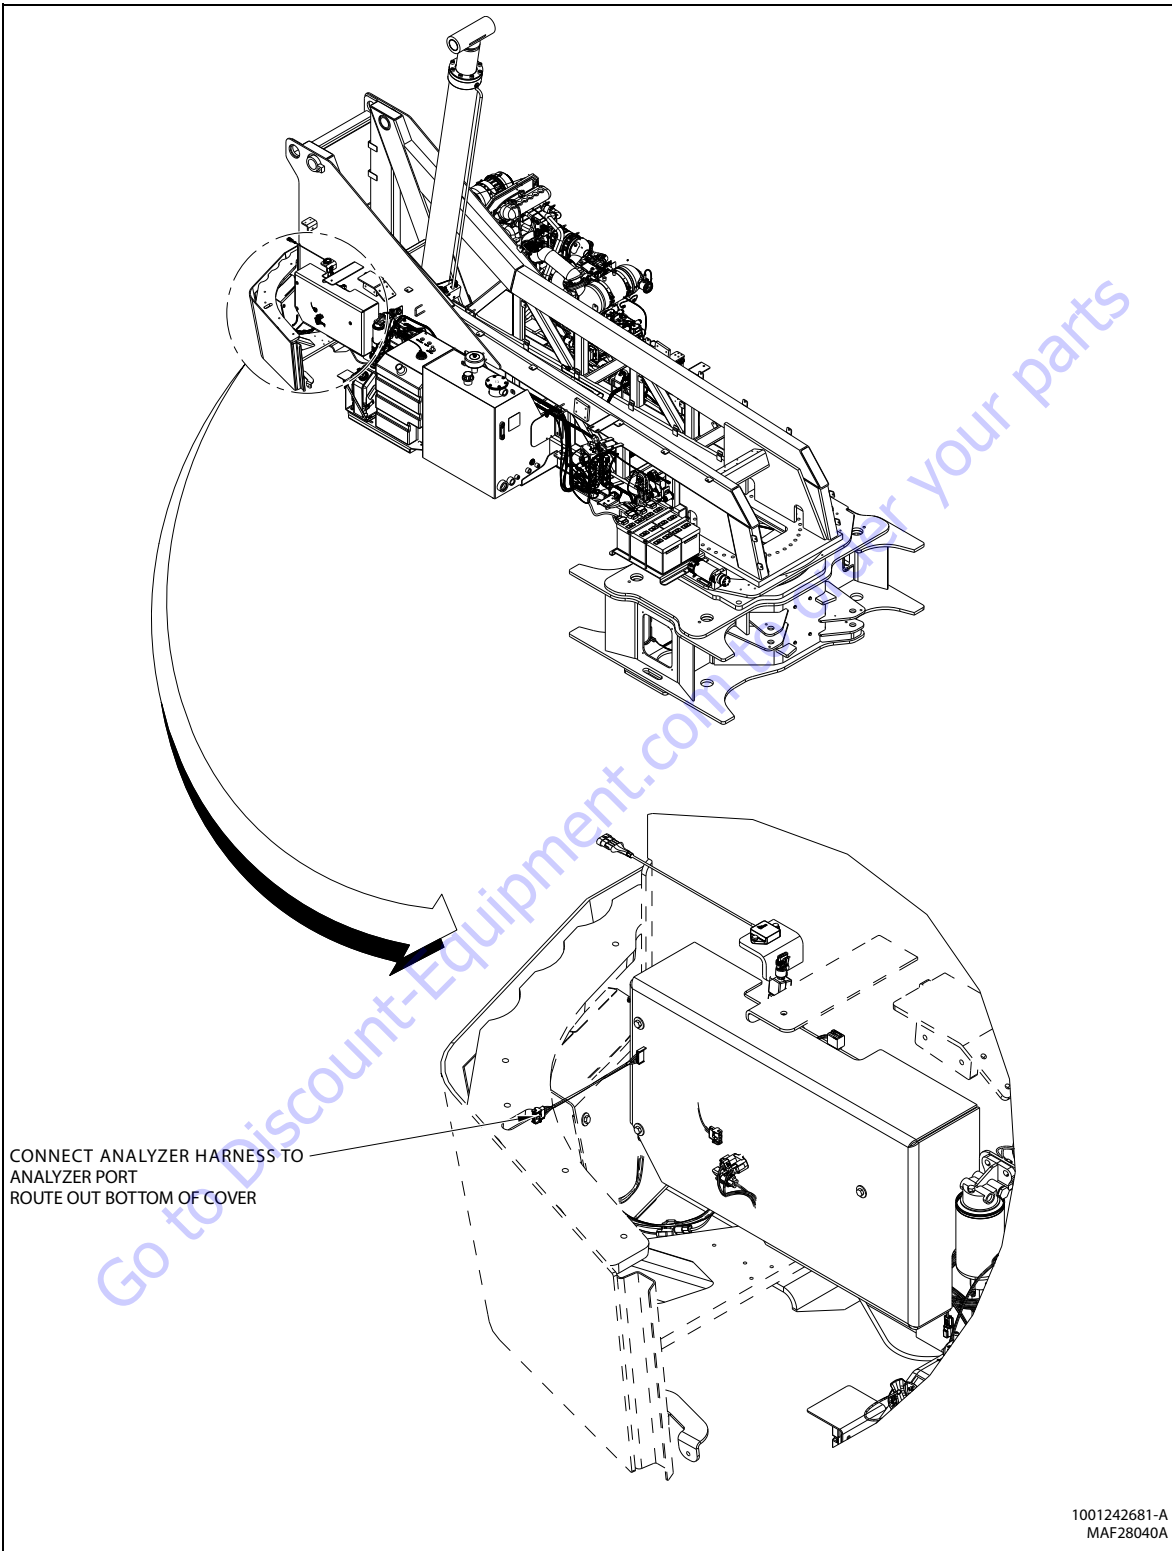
Electrical Installation (T4F) - Sheet 10 of 11
